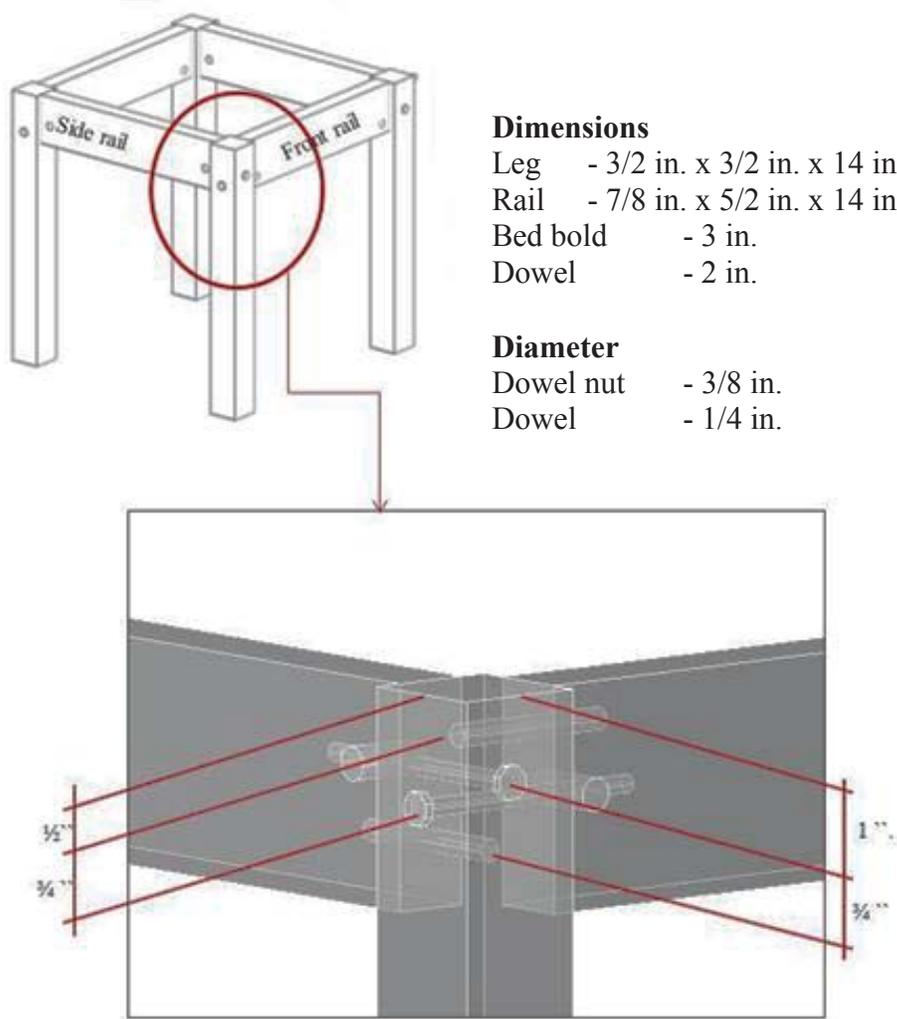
Bed bolt (Dowel nuts) joint frame construction configuration.
